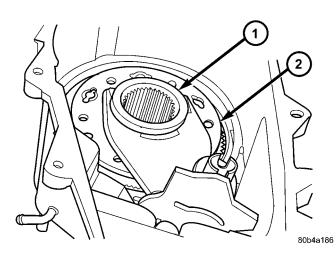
Install Range Fork And Hub Assembly 1 - RANGE HUB 2 - RANGE FORK
